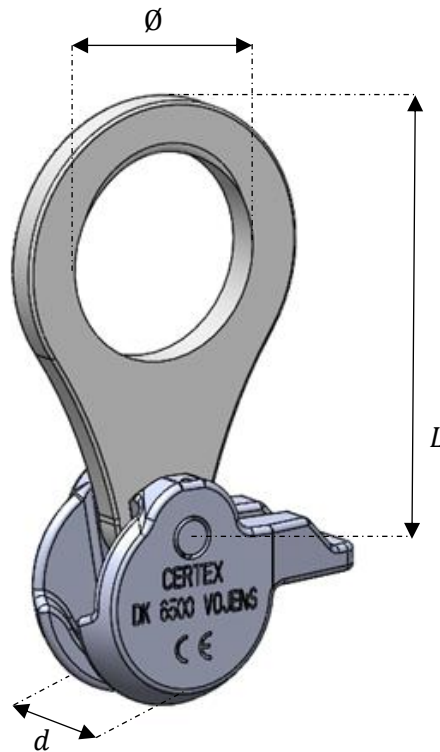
Starcon lifting eye standard coupling dimension sketch.
